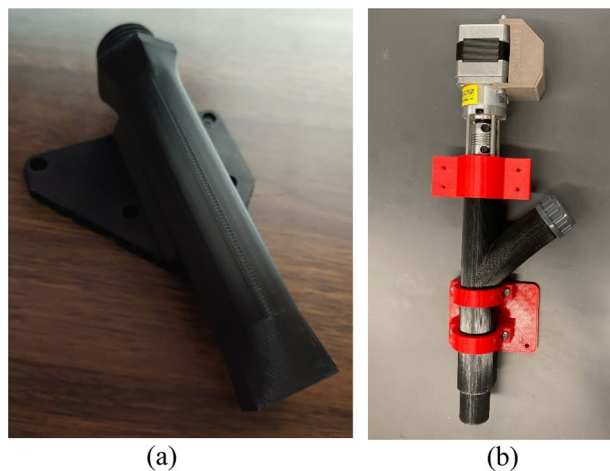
a, b Different nozzle systems printed and used to enhance the printing of Lutum V4
